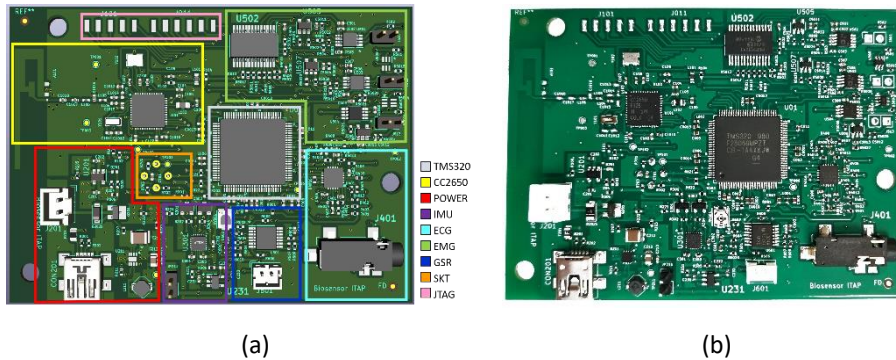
Multimodal acquisition system (a) PCB layout (b) Final solution (Cisnal et al., 2023a).
